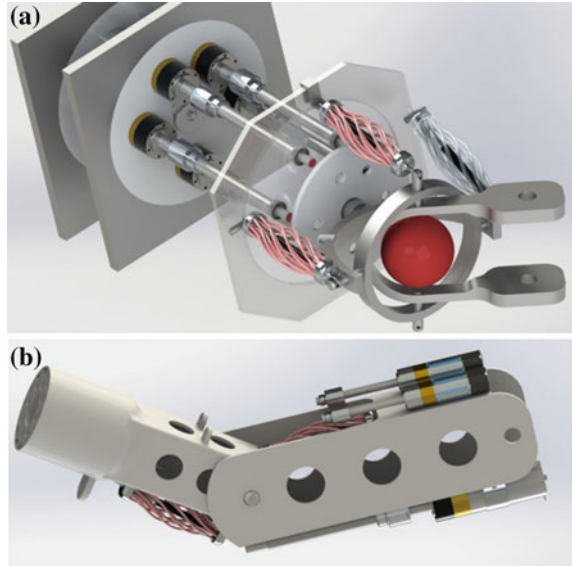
Details of robot arm: a actuation of the spherical shoulder joint; b upper arm and forearm of robot mechanism
